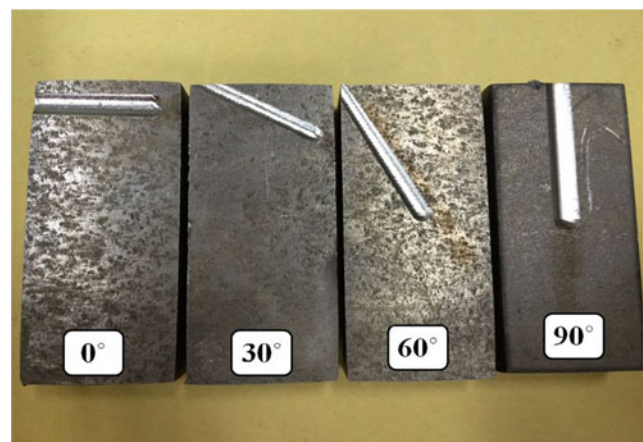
The machined surface of Ti-6Al-4V by applying tool path inclination angle
